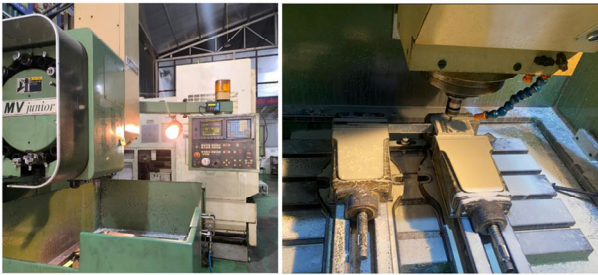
MORI SEIKI MV JUNIOR machine used in the experiment.
